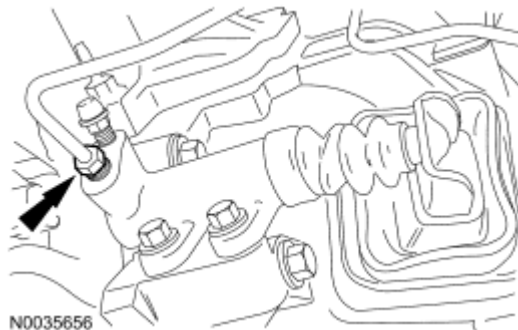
Locating Clutch Slave Cylinder-To-Clutch Master Cylinder Line
